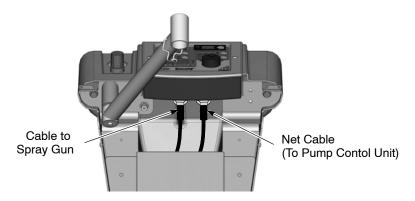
Spray Gun Cable Connection to System Controller – Mobile System Shown
